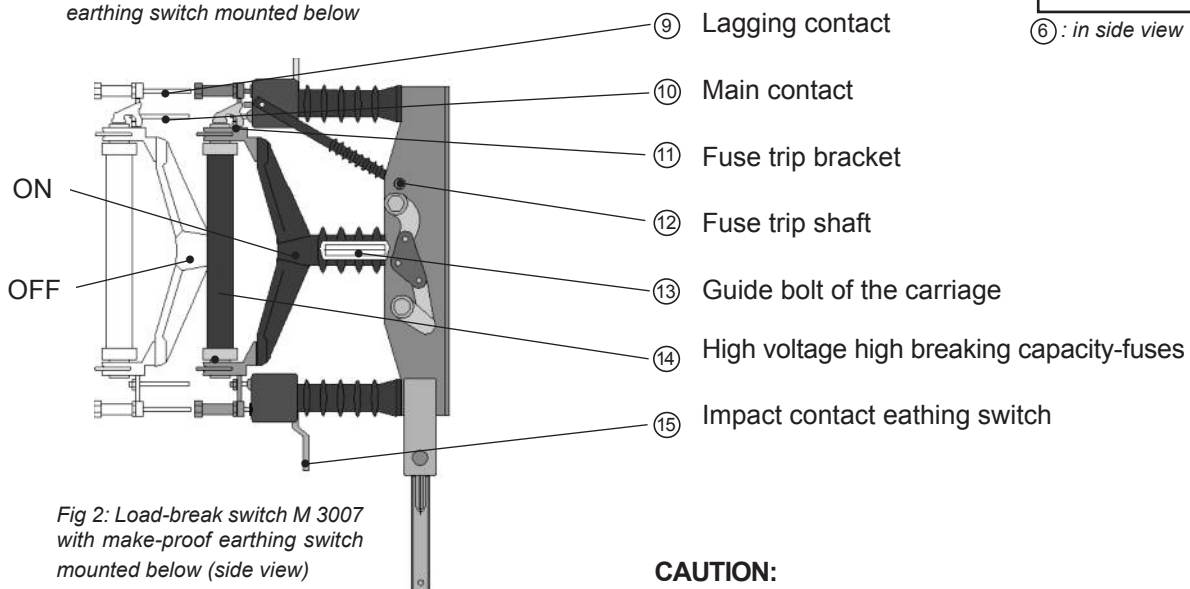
Load-break switch M 3007 with make-proof earthing switch mounted below (side view)
